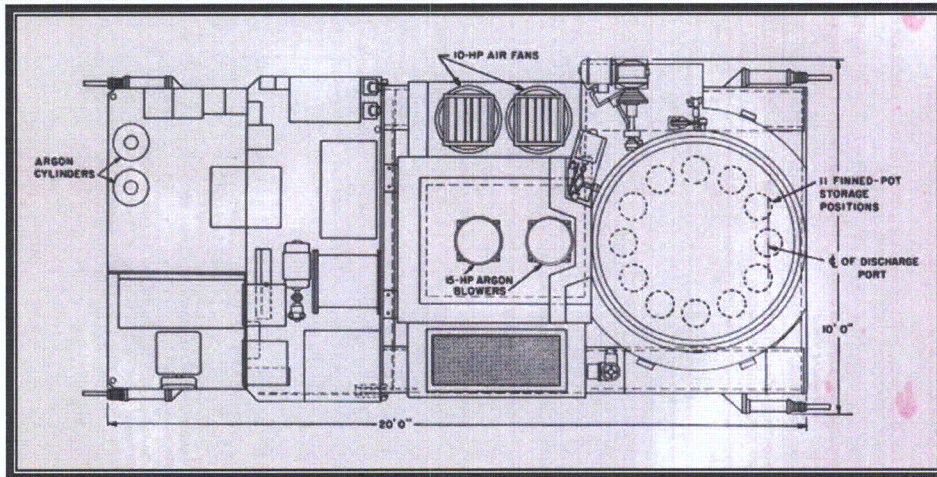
Plan of cask car showing storage cylinder (Courtesy DECo)
